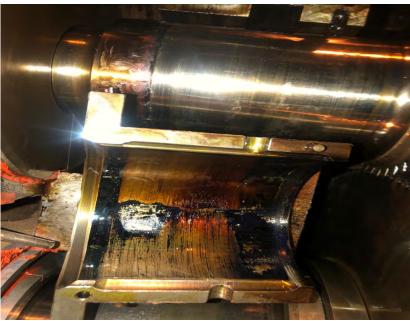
Varnish was found in the compressor gearbox, bearing, and shaft.
